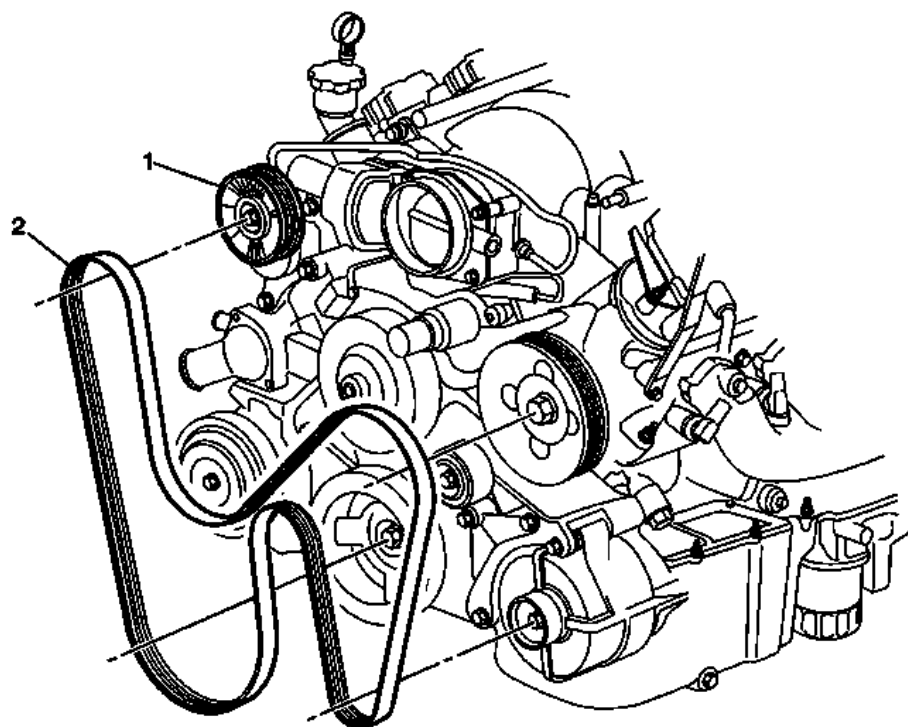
Drive Belt Routing - Accessory (Except LSA)
